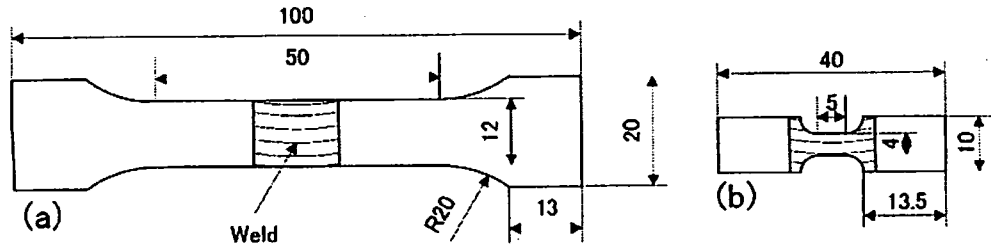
Configuration and size of the tensile tests used for (a) all specimens (b) only specimens welded at 200 mm/min.
